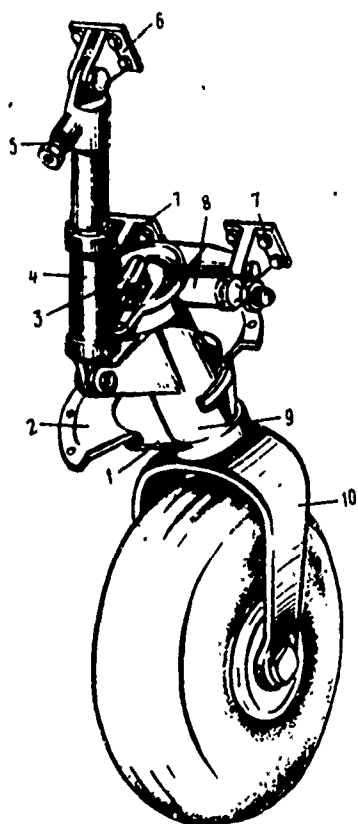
Tail wheel installation on aircraft of PNR production: 1 - rubber cover; 2 - fairing; 3 - centering device; 4 - shock absorber; 5 - charge valve; 6 - upper bracket; 7 - lower brackets; 8 - locking mechanism; 9 - yoke; 10 - wheel fork.
